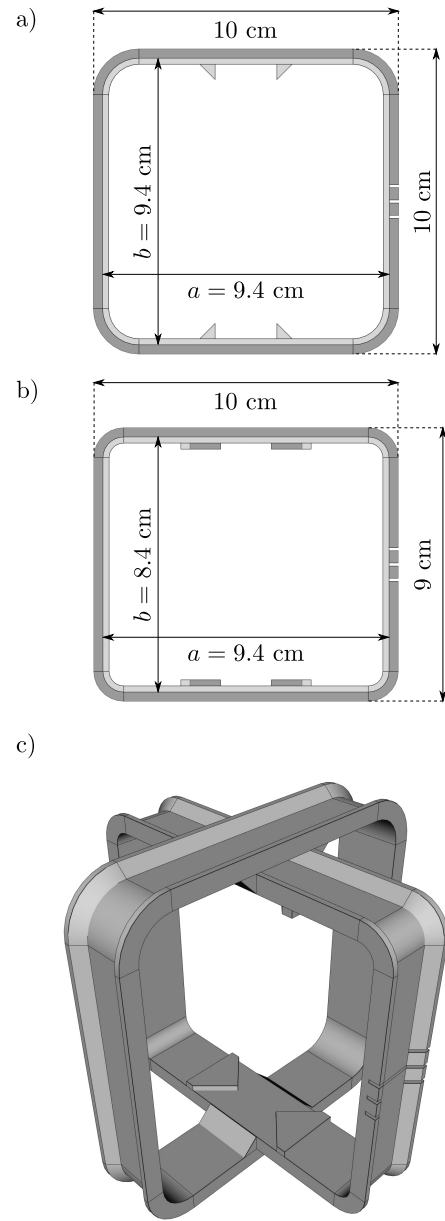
2D drawing of the outer (a) and inner (b) MTQ frame. (c) 3D drawing of the assembled MTQ frames.
